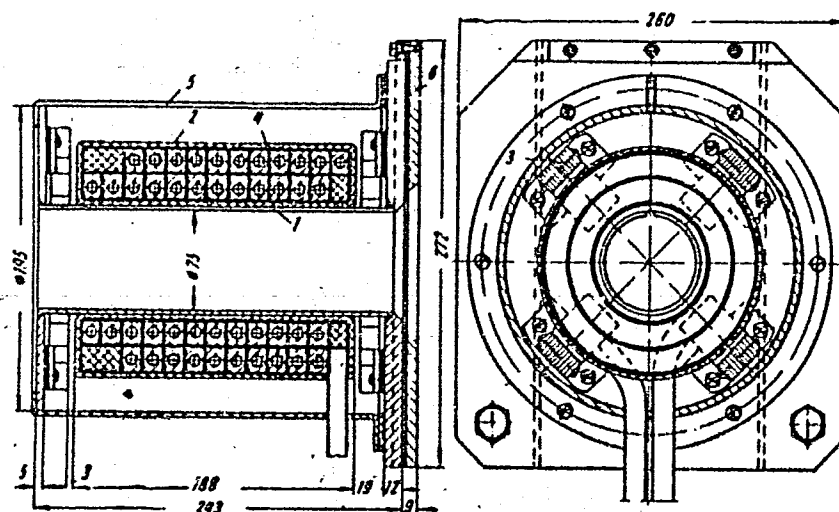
Inductor for hot rolling of tubes in KhPT-75 tube mill
